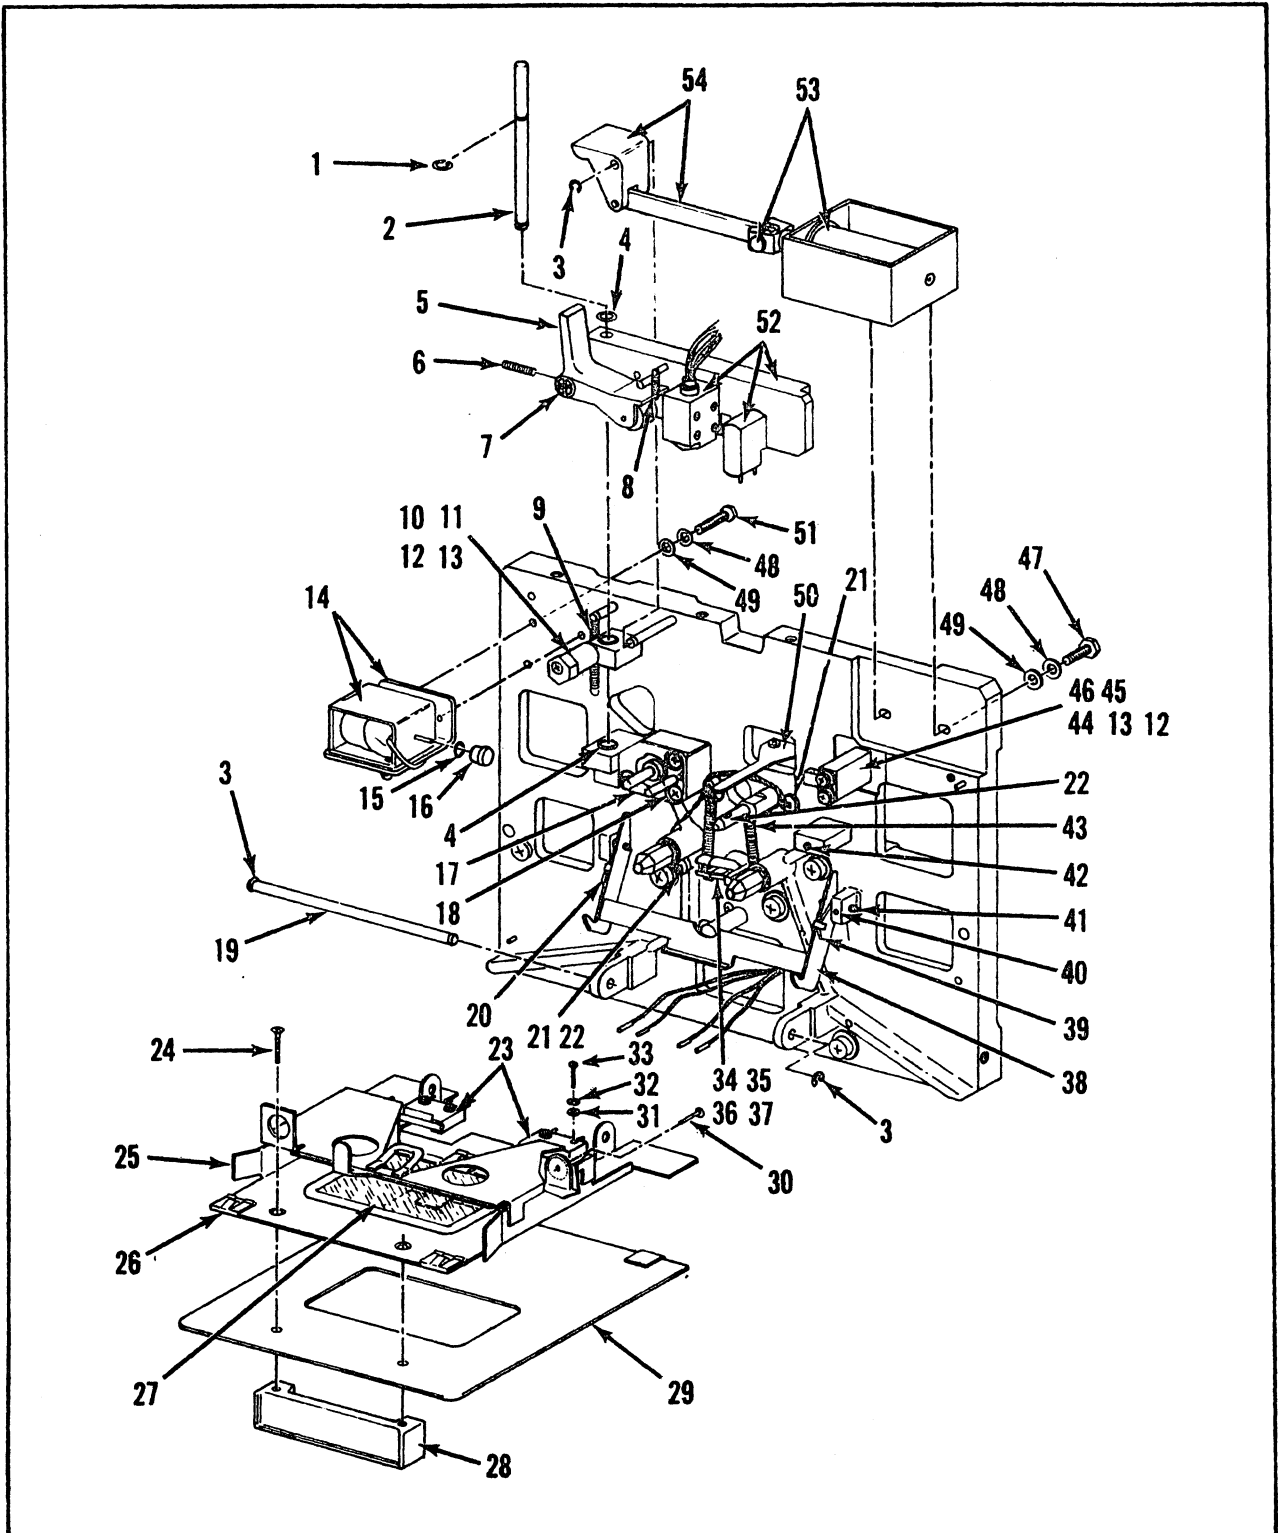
EXPLODED FRONT VIEW OF TT120 TRANSPORT
